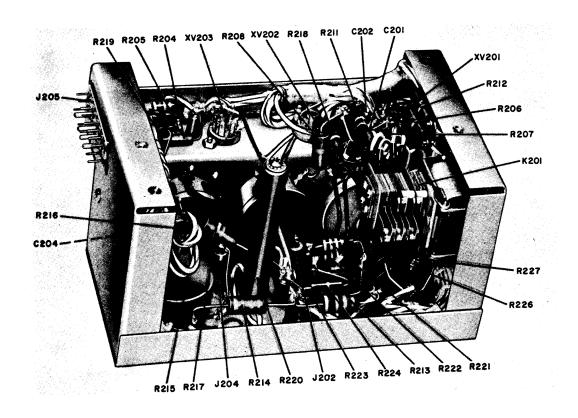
Keyer Chassis, Top View, Location of Parts
